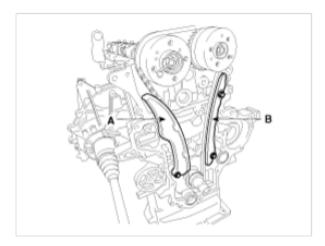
Identifying Timing Chain Tensioner Arm And Guide Courtesy of HYUNDAI MOTOR AMERICA
